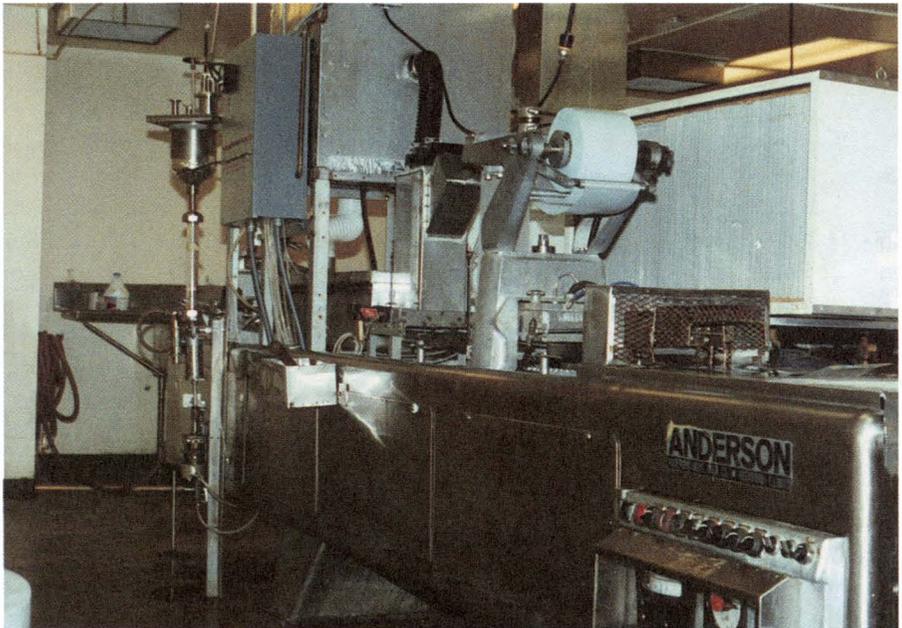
Thermoforming packaging unit to form and assemble rearing trays.
